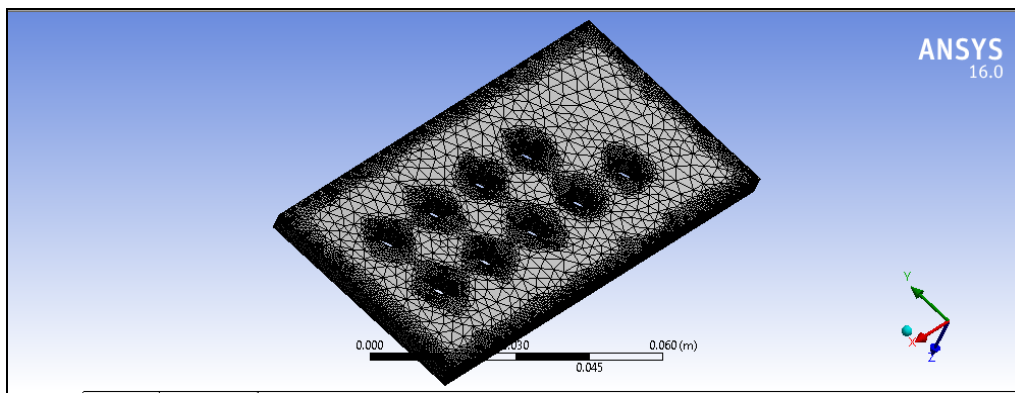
Model of work piece after drilling with 5mm diameter HSS drill bit with meshing
